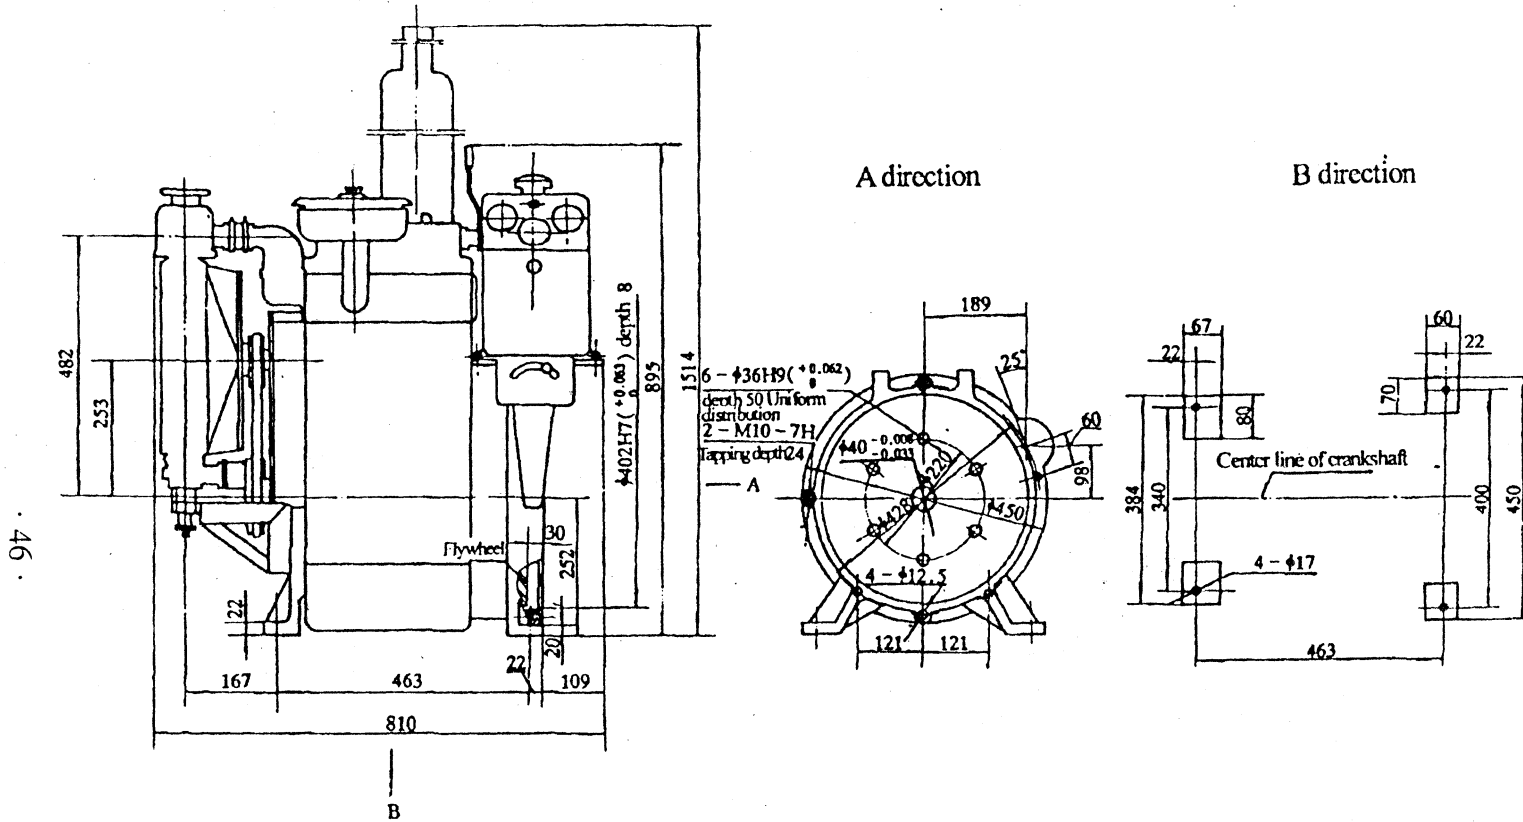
Contour and mounting dimensions of Model 295C₁、295C₁A、SD2100C₁ and SD2100C₁A diesel engines (II)
